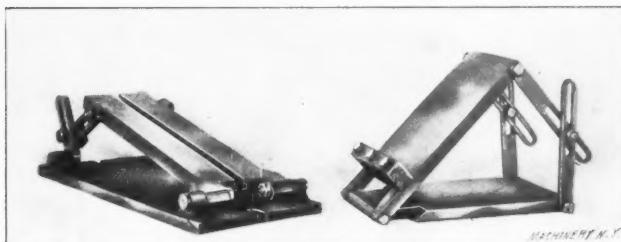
Adjustable Angle-plates for Milling Machine and Drill Press.
